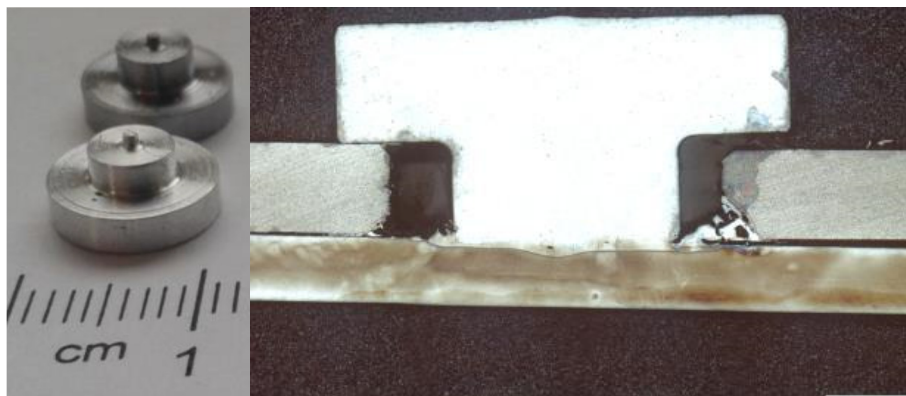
Left: Elements used - Right: Arc element weld of aluminium to steel (Source: SLV)
